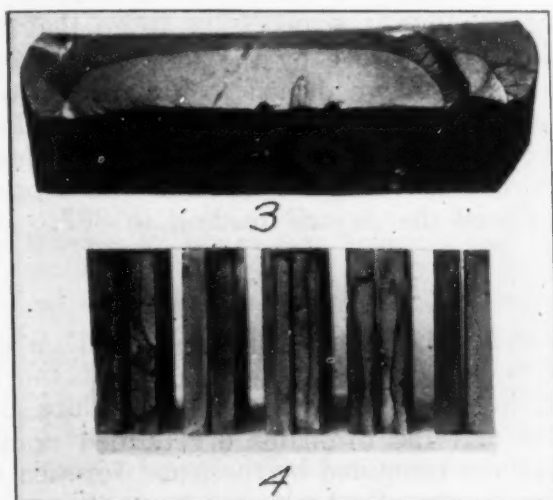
Fracture of Special Spring. Note that Failure Started at the Two Prick-Punch Marks.
